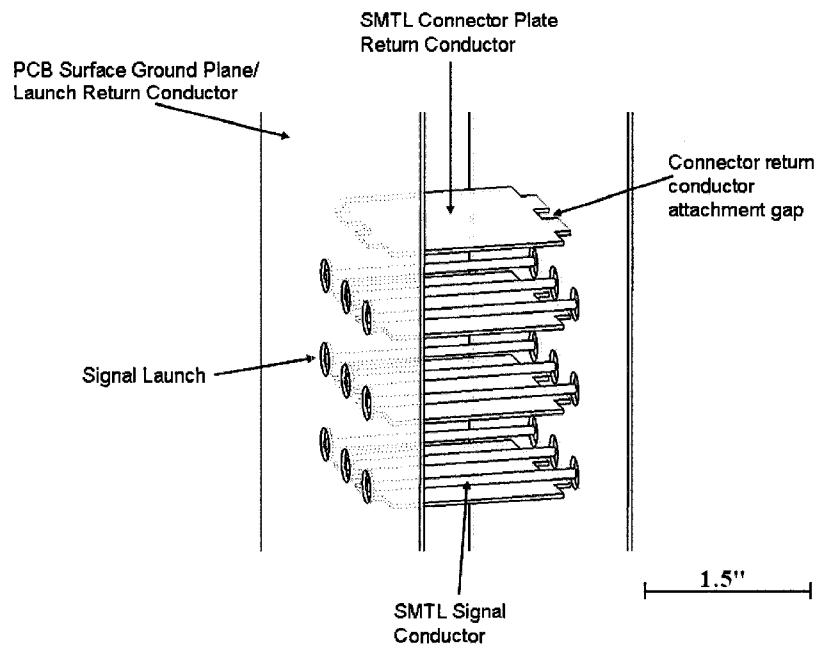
Illustration of a hypothetical shielded PCB-to-PCB connector.
